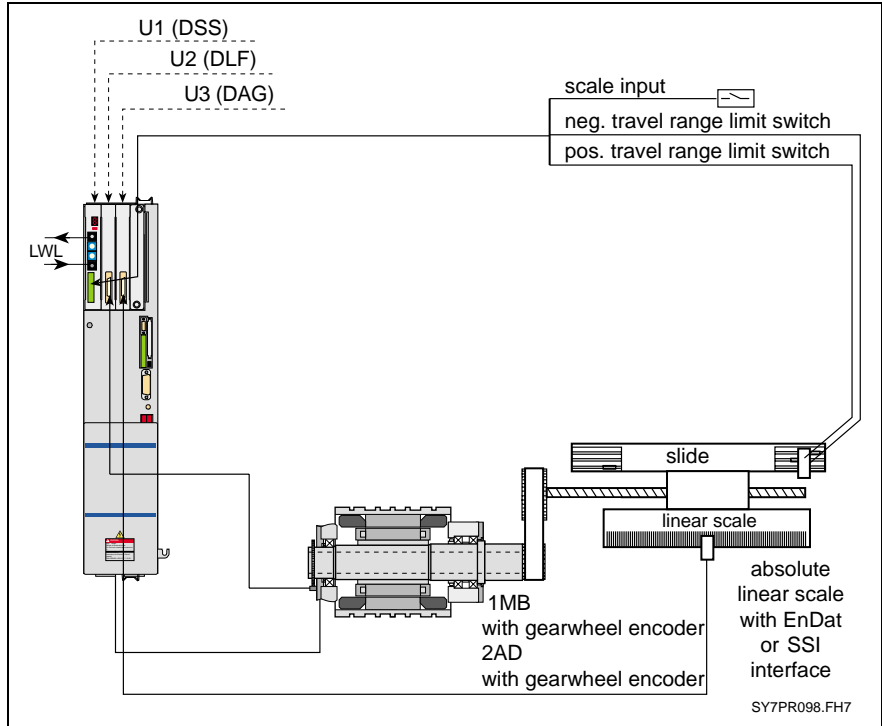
Drive with 1MB or 2AD motor with gearwheel encoder with direct absolute position detection
